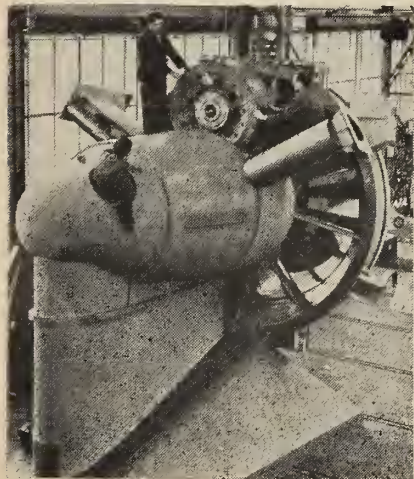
11,000 hp. Compressor incorporating Two Allen-Stoekicht Speed Increasing Gears.
